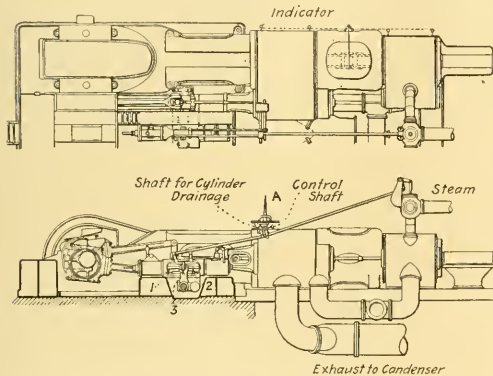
VALVE GEAR OF REVERSING ROLLING MILL ENGINE
